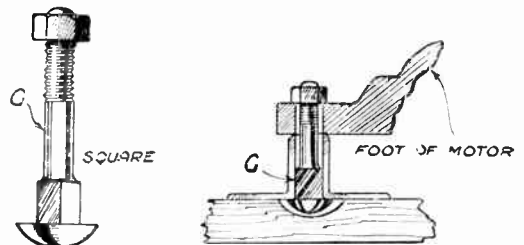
D.—BOLT USED FOR HOLDING MOTOR TO RAILS.
